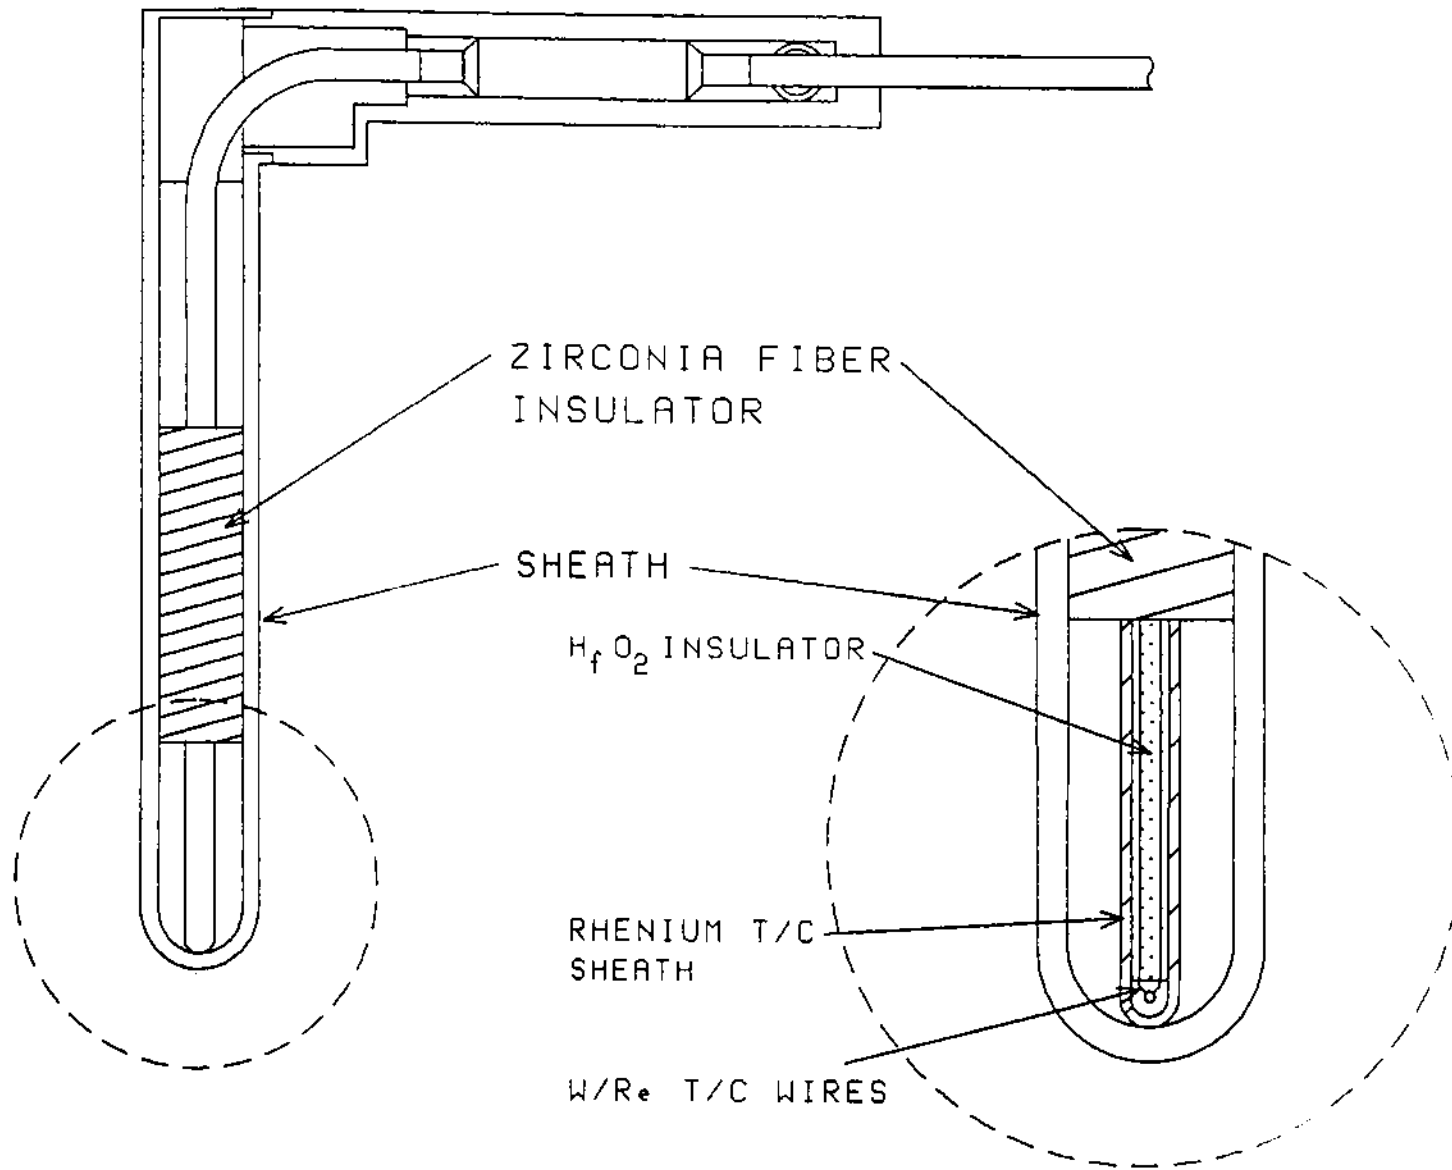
Diagram of W/Re Thermocouple Assembly.
